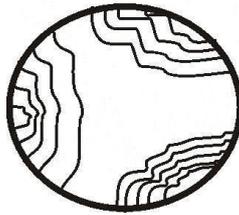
Pelton turbine shaft fatigue fracture.
